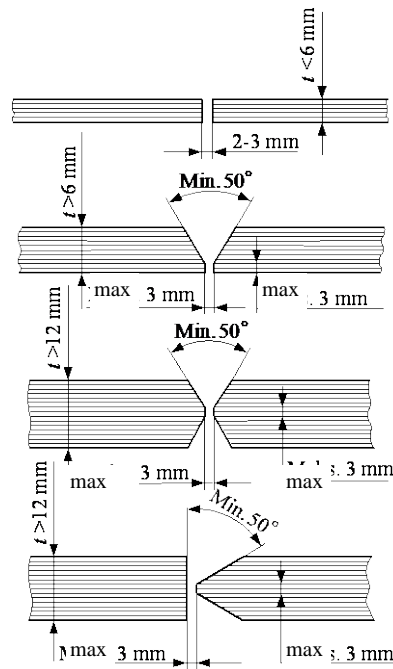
Edge preparation for manual welding with butt joints
